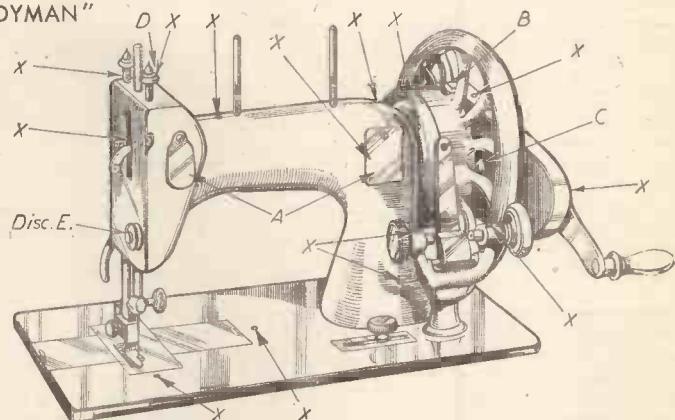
General view of a domestic sewing machine: A, the metal plate behind the winder; B, end of connection uniting hand appliance to machine; C, small lever to shut off machine when winding bobbins; D, tension screw. The points marked X are those which require lubrication.
